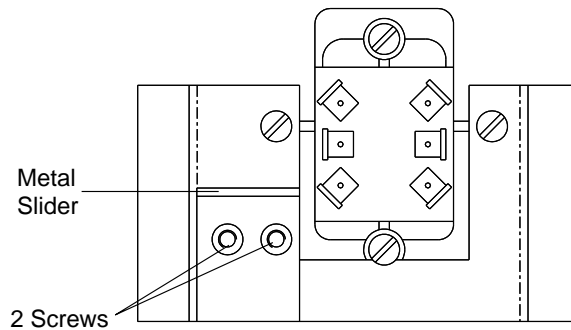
UEPO Switch For 3745 Model 130, 150, 160, or 170 (Rear View)
